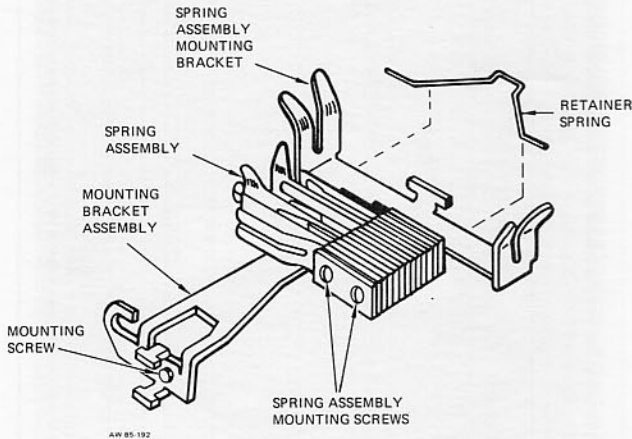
Models 79613 and 79971 Exclusion Switch Assemblies, Component Locations
